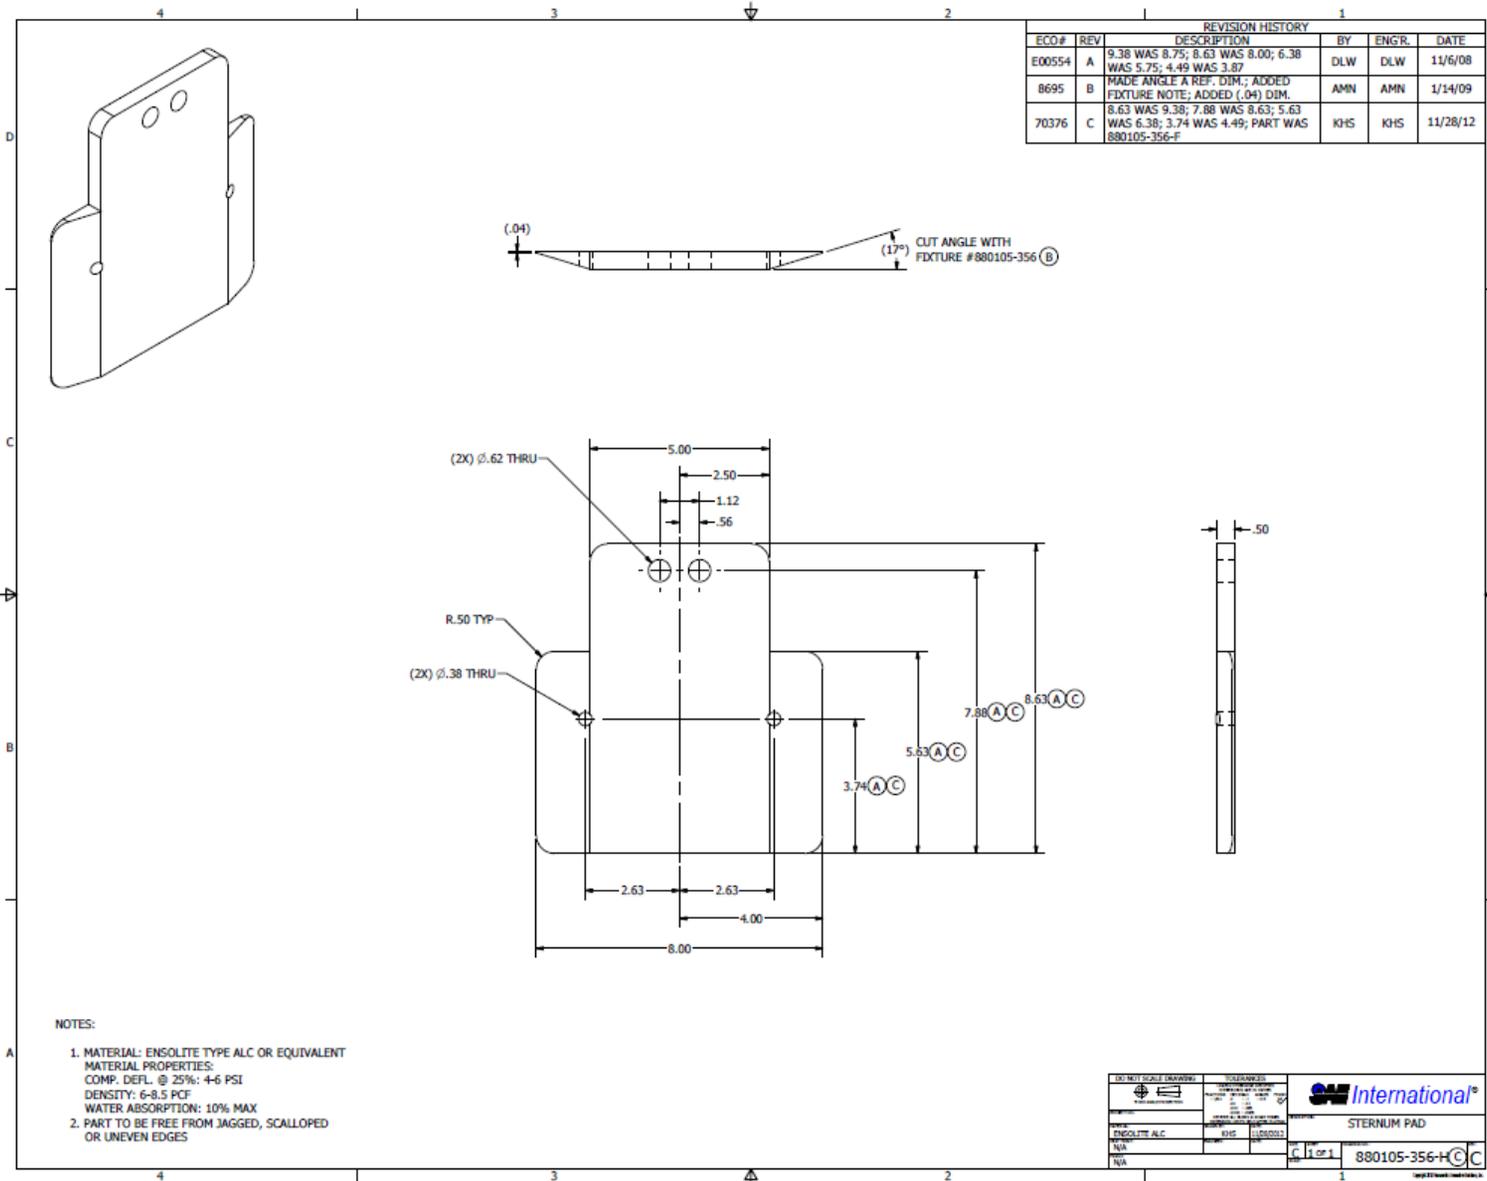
REVISED CHEST JACKET PAD DRAWING
